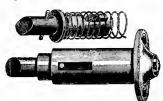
Seat Back Arm Lock, Bolt and Spring. Adams & Westlake Company.
